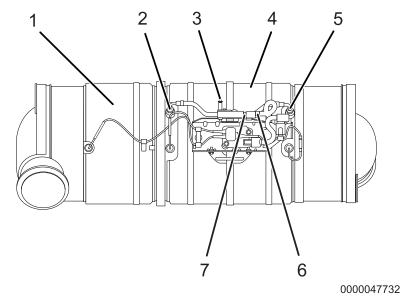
Diesel Particulate Filter (DPF) Pressure Tubes.
